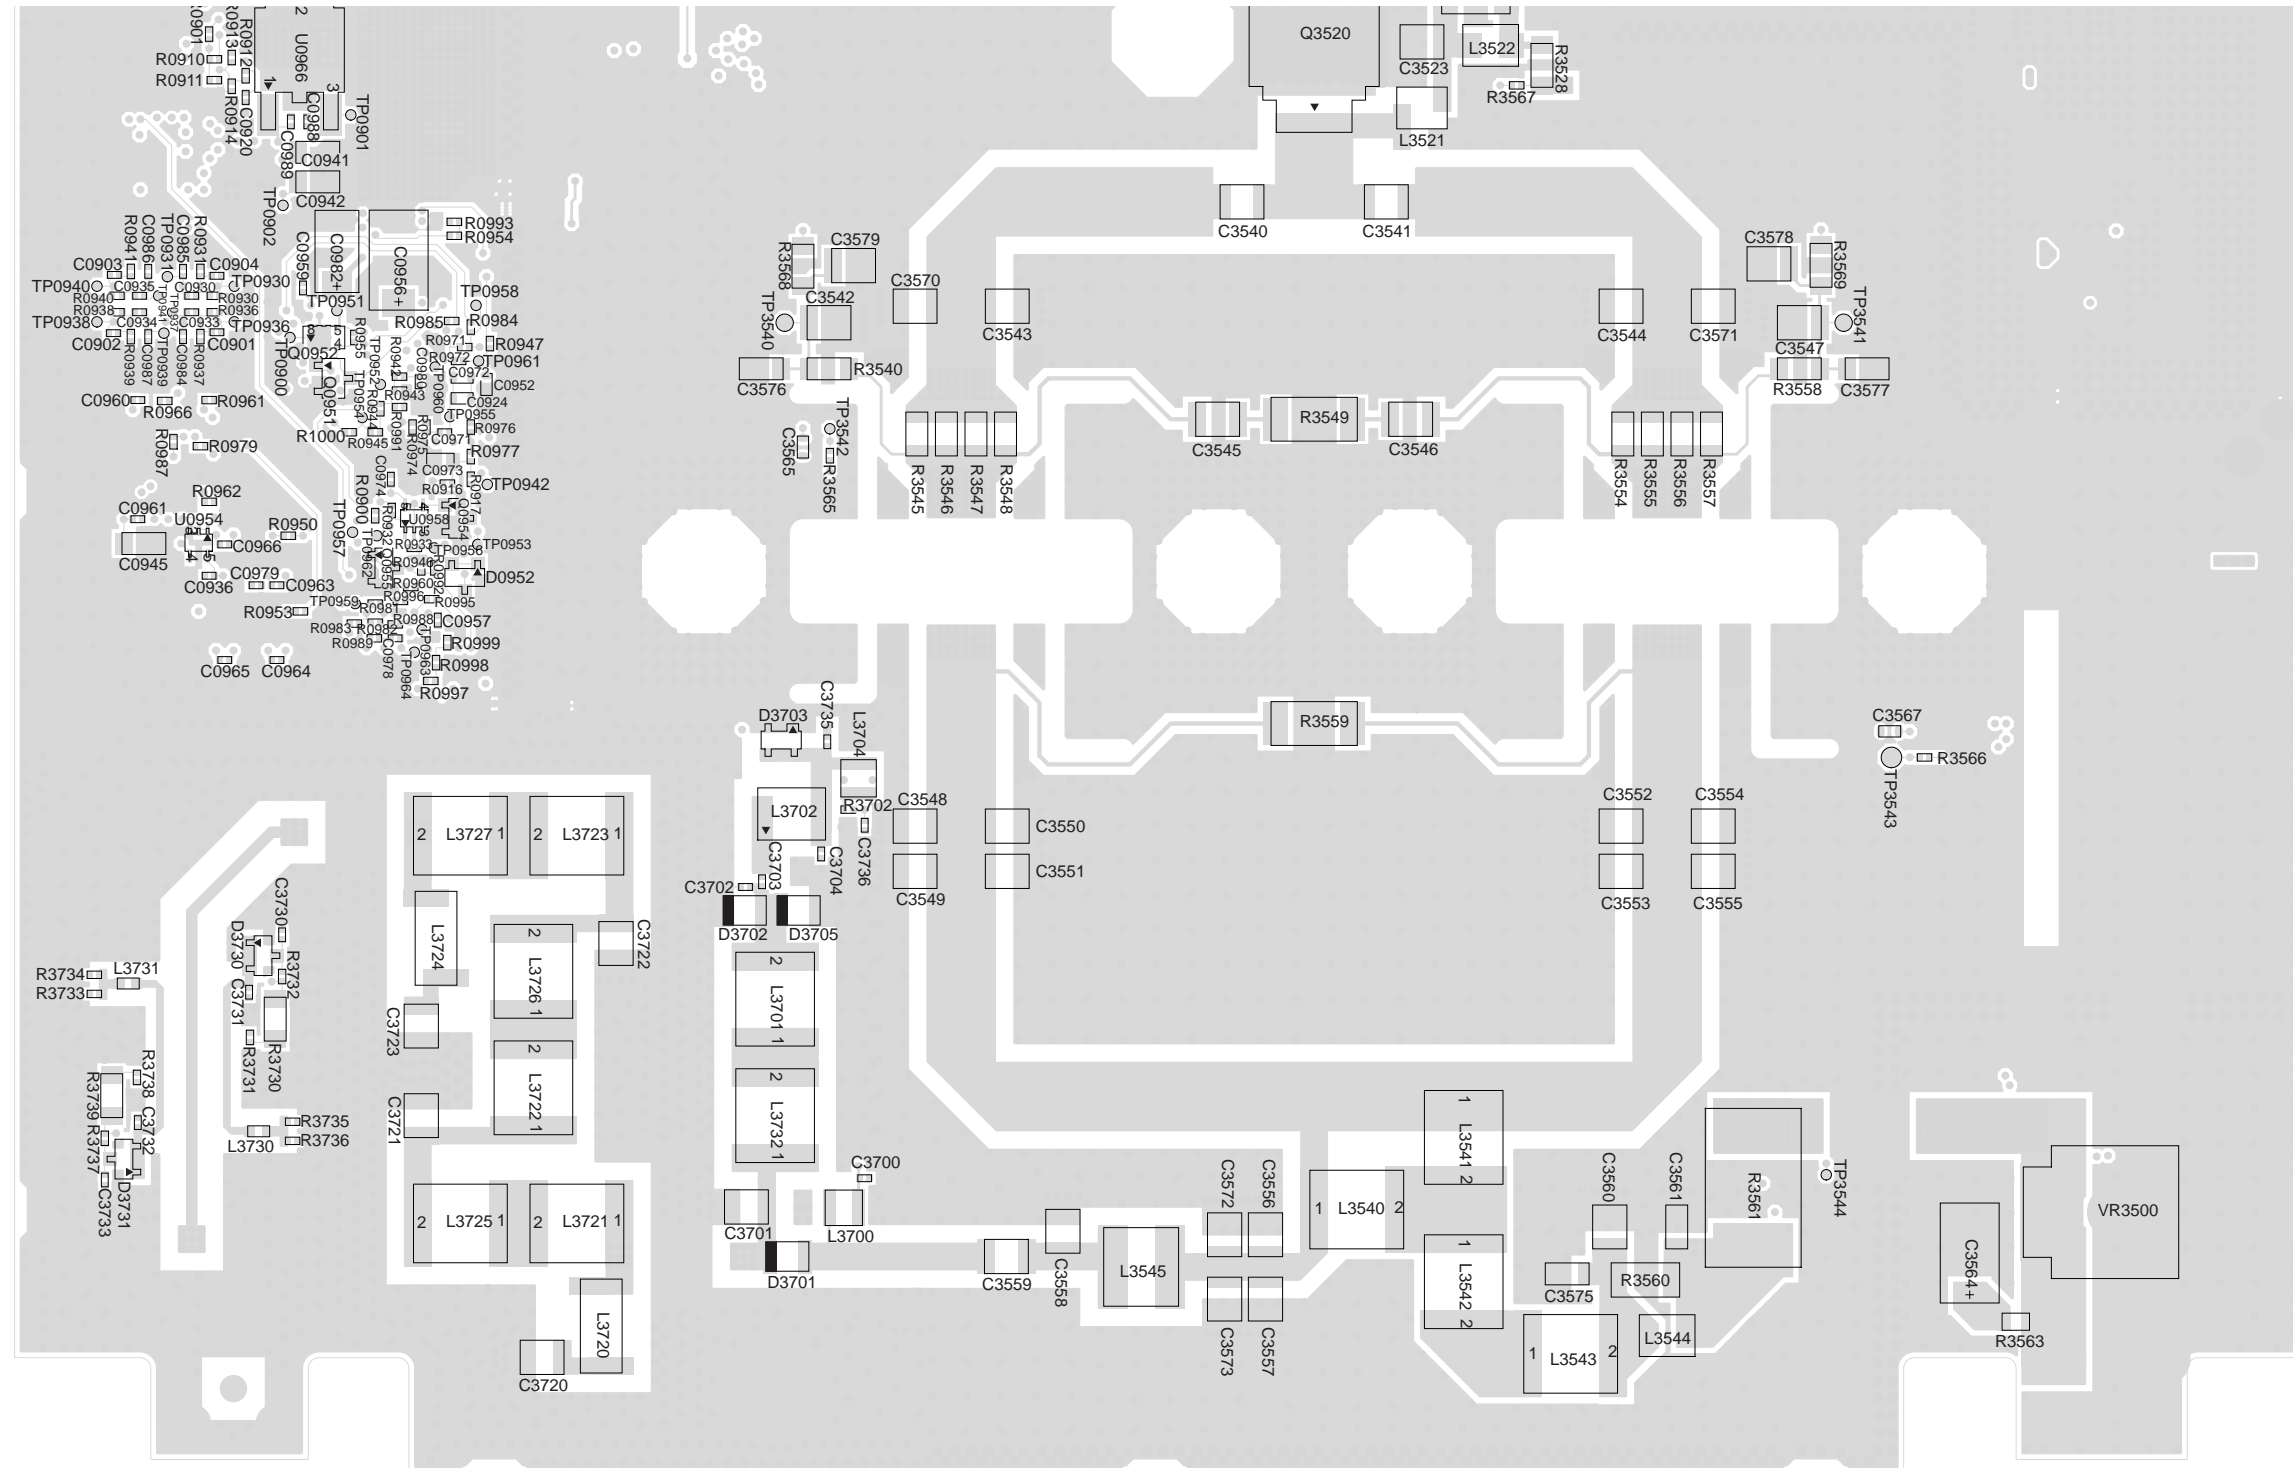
HUD4025B Main Board Layout—Side 2 Bottom
